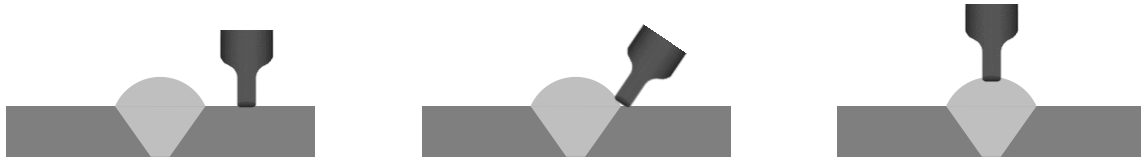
Probe tip position on the weld. Flat on in the HAZ (left), with an angle on the toe (center), and flat of the top of the weld (right).
